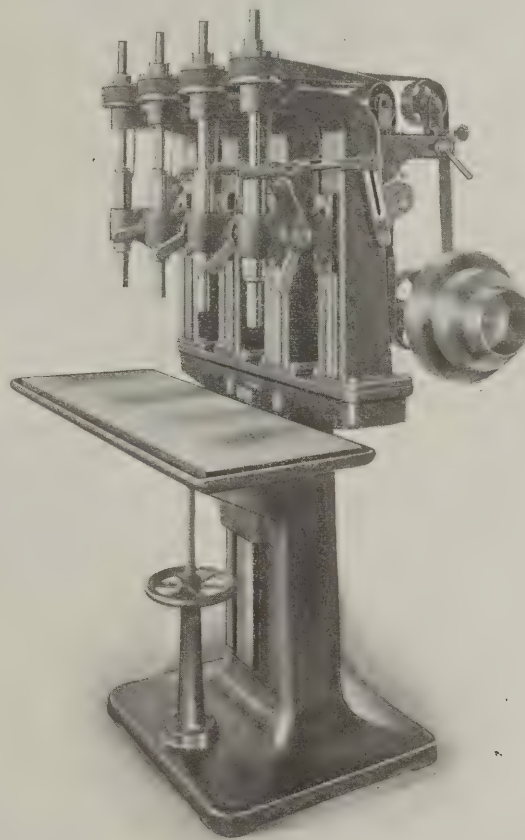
Dwight Slate Cam-feed Automatic Drilling Machine
